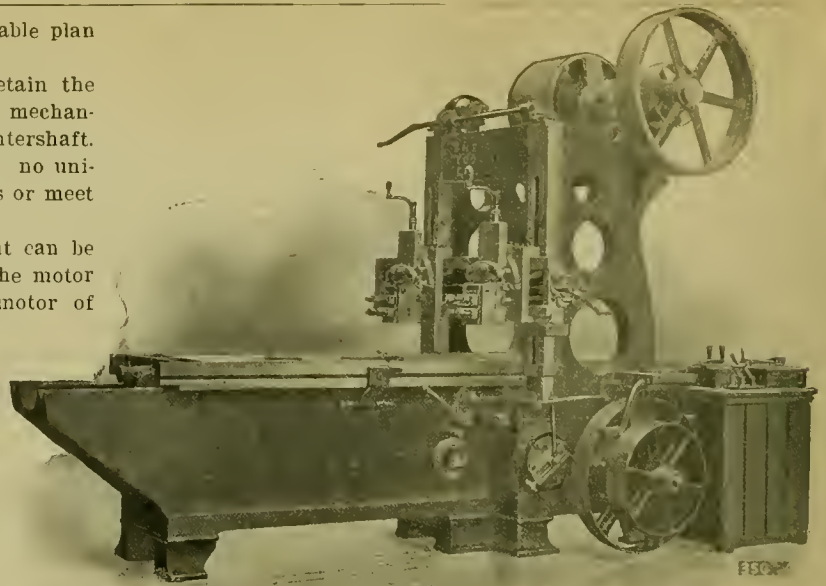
DIRECT CONNECTED MOTOR DRIVE UPON A PLANER BUILT BY THE AMERICAN TOOL WORKS COMPANY, SHOWING USE OF FLYWHEEL. BULLOCK CONSTANT-SPEED MOTOR.
